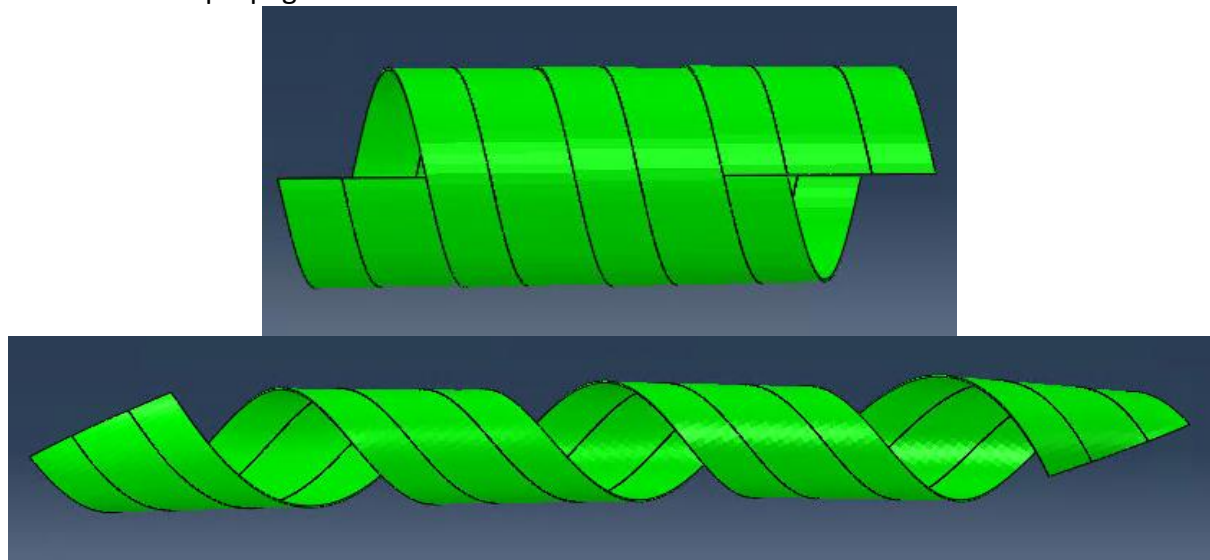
Model of the three individual metal strips. Upper: Undeformed section with the master and slave surface bonded. Lower : Deformed section without bonded surfaces
